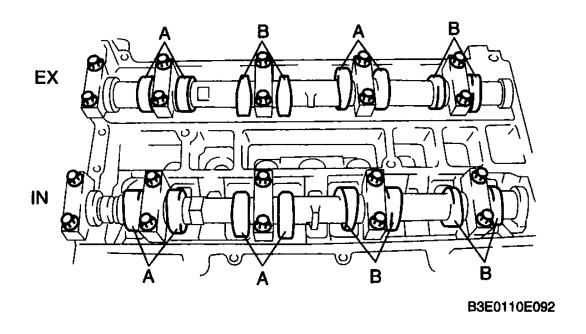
Measuring Valve Clearance At Point A Courtesy of MAZDA MOTORS CORP.
